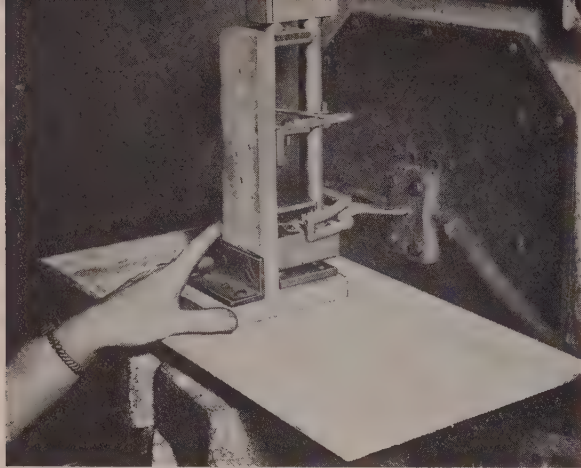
Steel parts, held in correct relative position in the insulating fixture shown here, have certain joints silver soldered by induction heating in this setup to produce a gas manifold assembly
